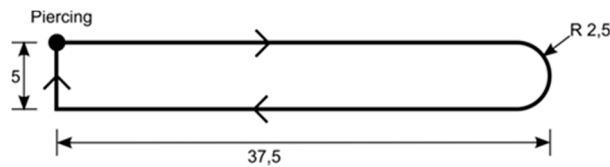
Geometry of the test pattern cut clockwise (dimensions in mm).
